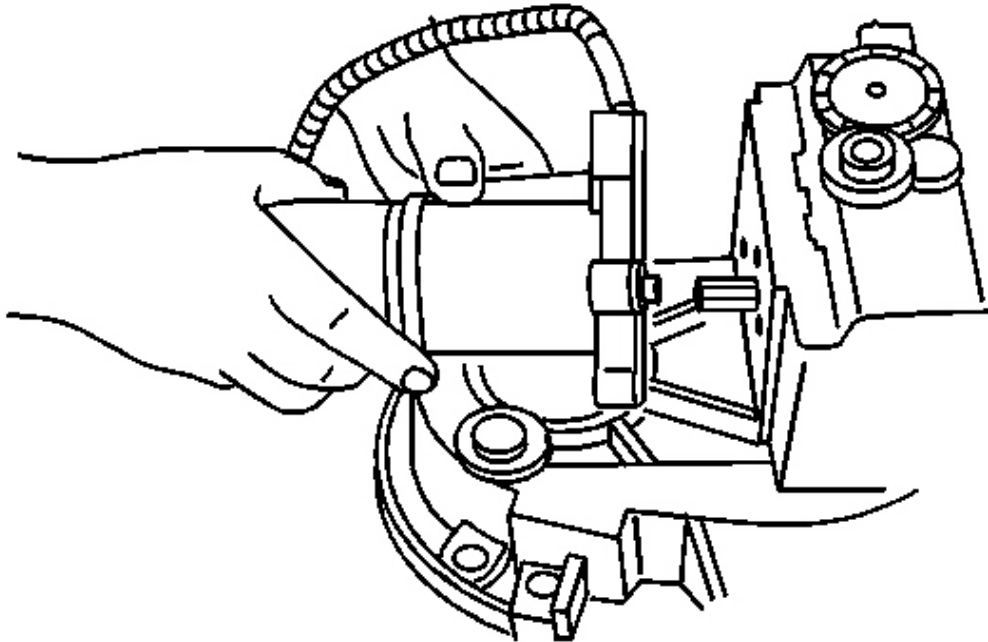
Removing Front Output Shaft Dust Seal
